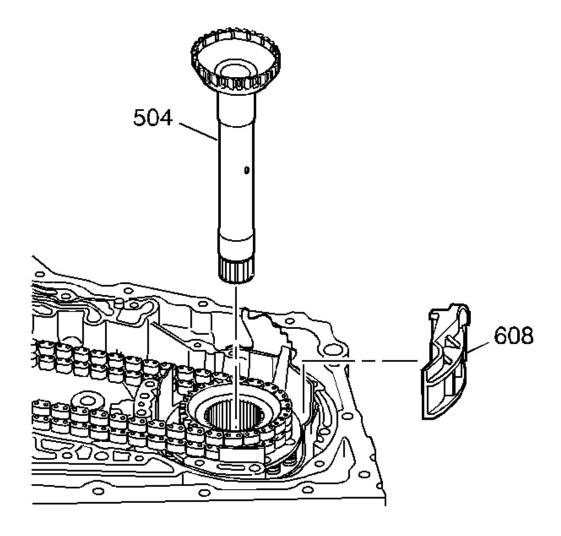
Locating Fourth Clutch Shaft Assembly Courtesy of GENERAL MOTORS CORP.
